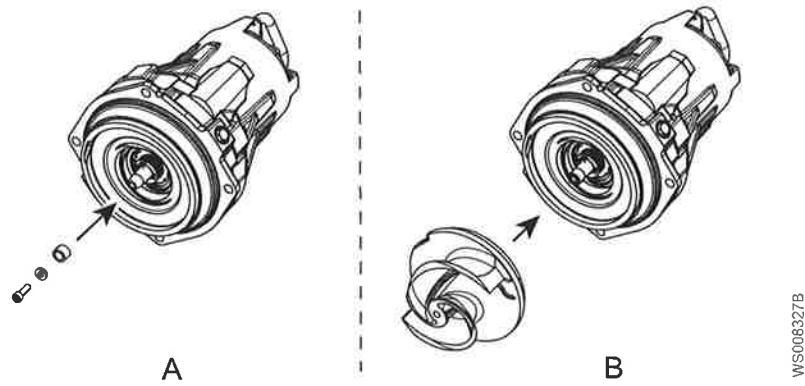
Fitting conical sleeve, washer and screw on shaft (A), and fitting impeller on shaft (B).
